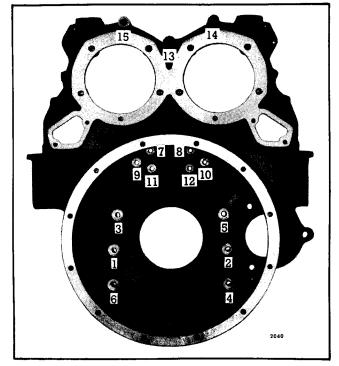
Flywheel Housing Bolt Tightening Sequence (Operation 2)-In-Line Engine
